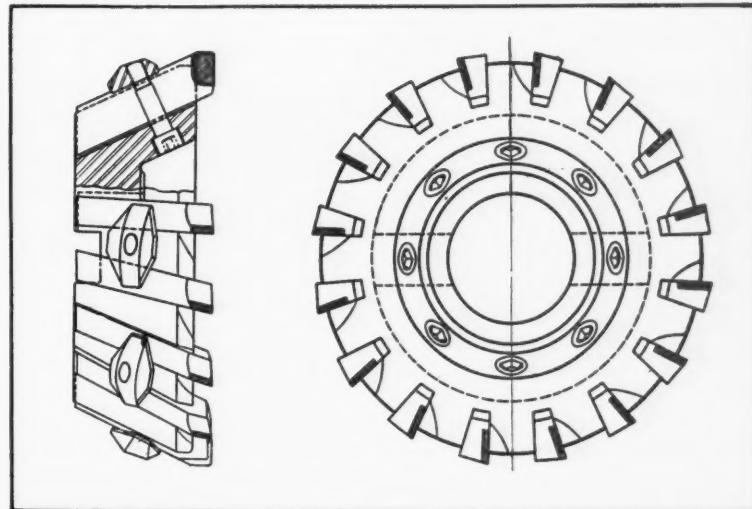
Milling Cutter with Inserted Carboloy-tipped Blades
